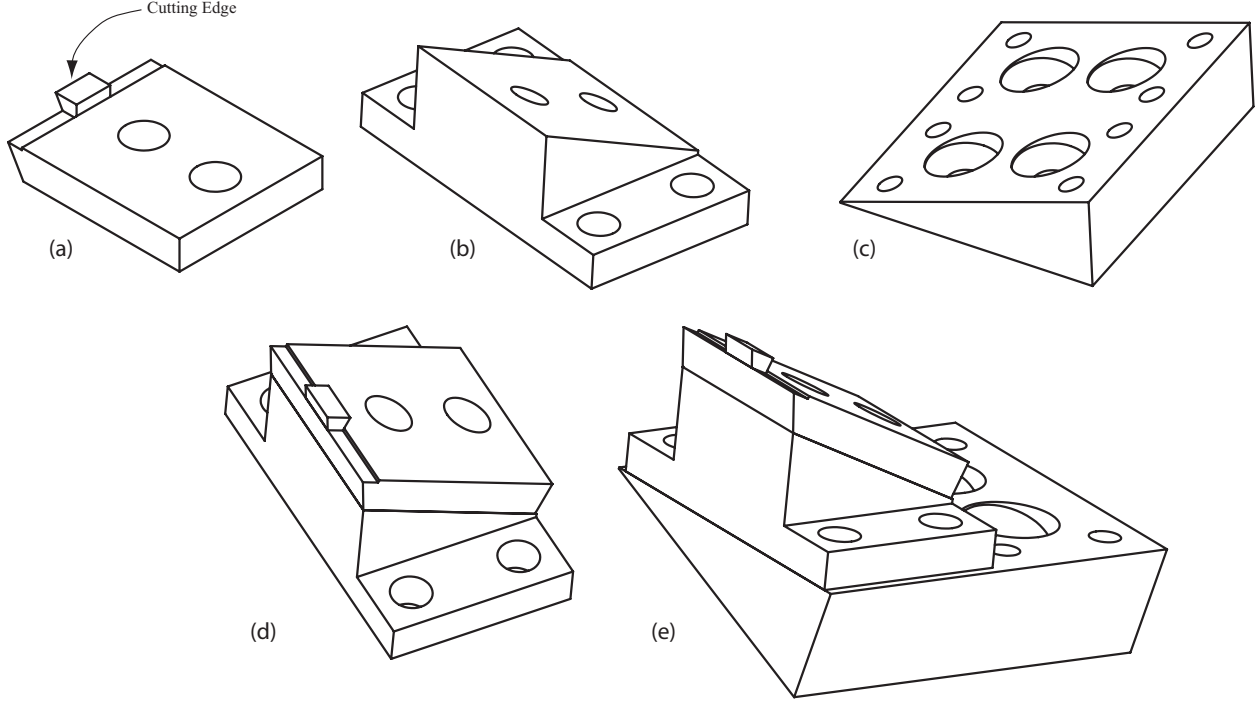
(a) Diamond tool design, (b) Holder for adjusting the rake angle, (c) Holder for adjusting the inclination angle, (d) Tool assembly with rake angle adjusted, and (e) Tool assembly with rake and inclination angles adjusted.
